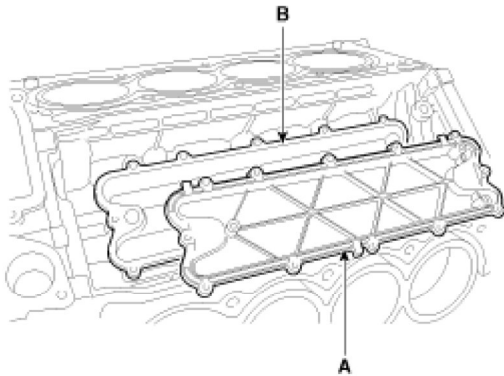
Identifying Cylinder Block Bank Cover & Gasket
